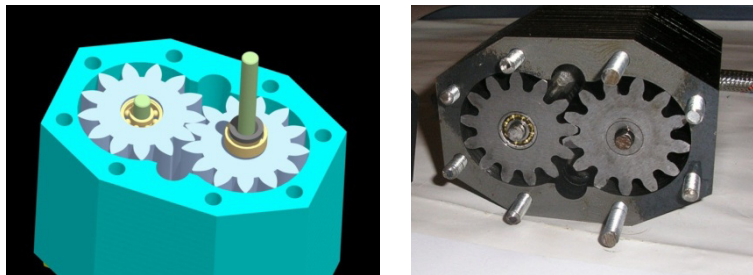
The illustration of gear pump CAD model and the manufactured gear
